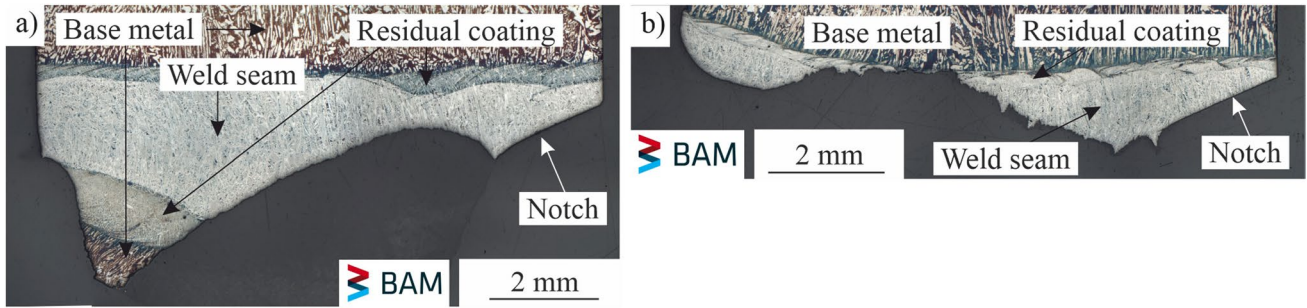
Cross-section of broken impact testing specimens: from the side (a); from the middle (b)
